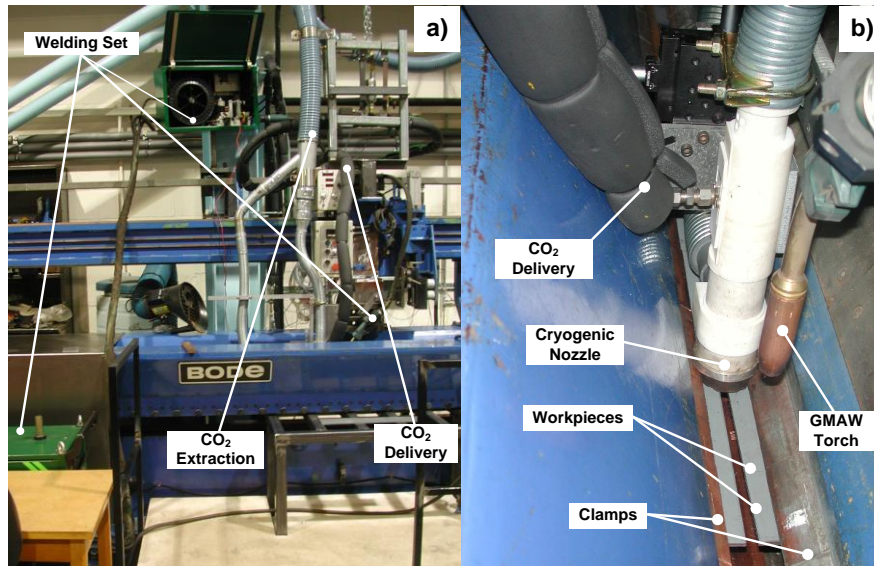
Setup1: first installation of TTC and welding equipment on seamer a) overall view b) limited access in the groove of seamer
